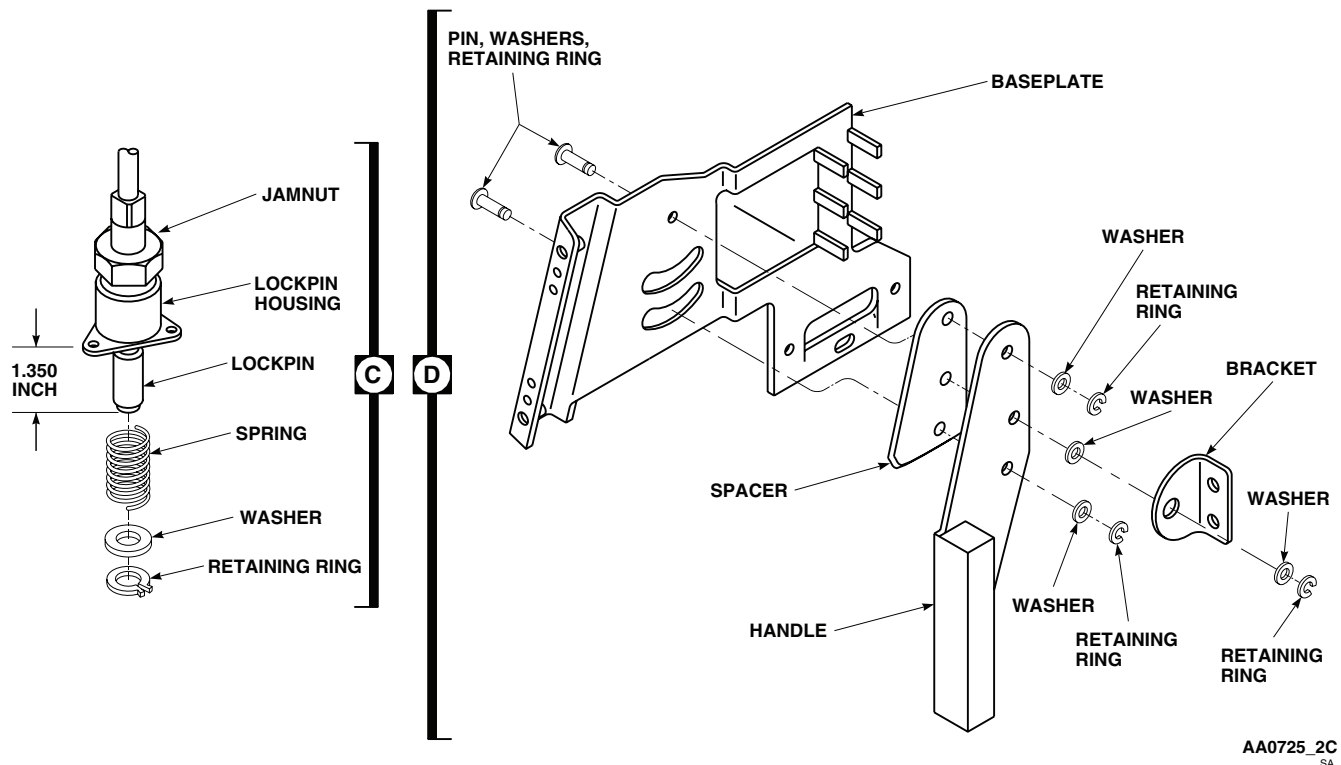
Adjust Handle and Baseplate. (Sheet 2 of 2)
